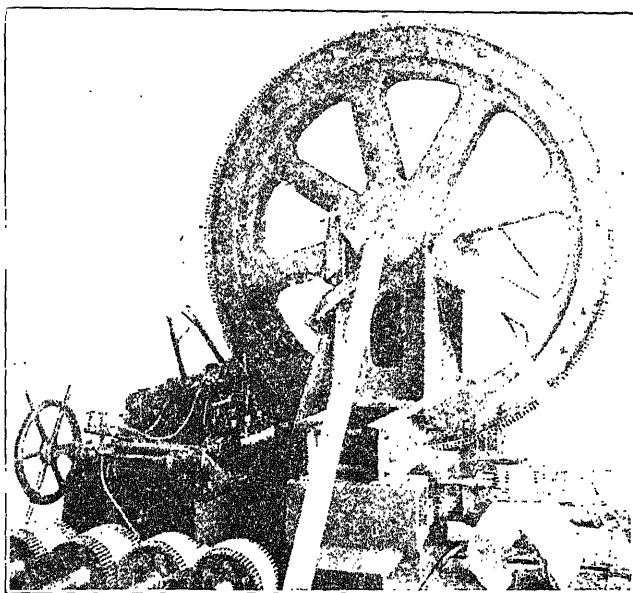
Welding End Ring and Rotor Bars for 1400-H.P. Motor.
